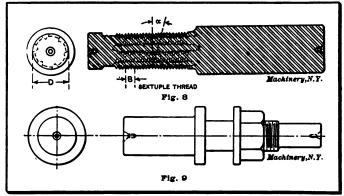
Hob used for Cutting Concave Knurls in the Milling Machine Fig. 9. Arbor for Cutting Concave Knurls in the Milling Machine
